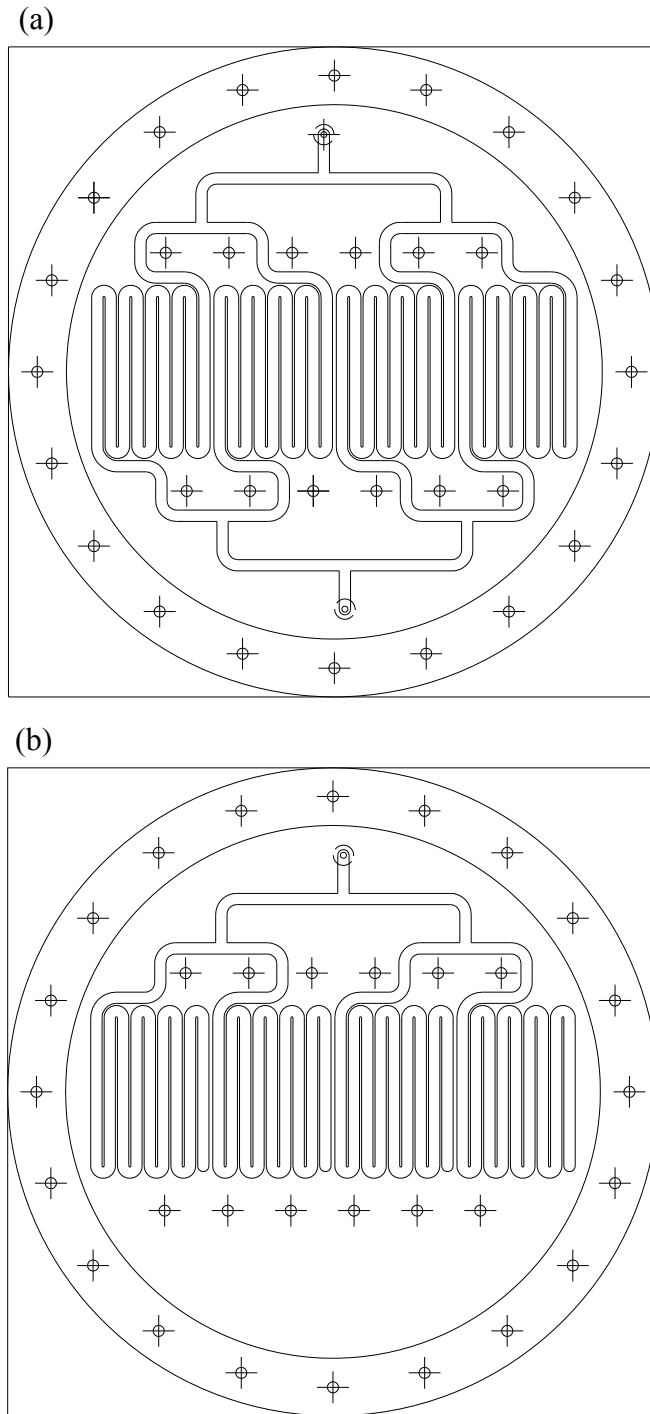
Drawing of channel for (a) retentate and (b) permeate sides of membrane separator. Drawings are at 1:2 scale.
